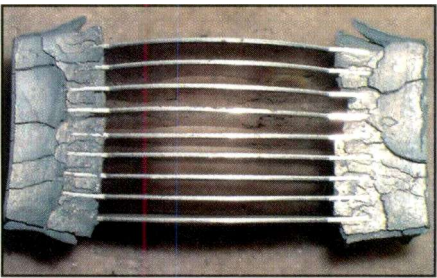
Photo D. Here's the bottom view of the same stator block shown in Photo C. Notice how the stator plates have been bowed outward on both sides by the distorted pot metal casting.
